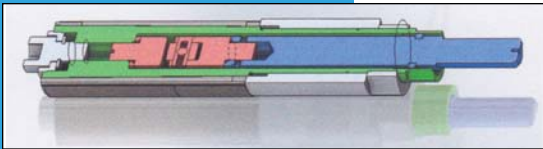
Tool Assembly Illustrating Internal Float Mechanism
